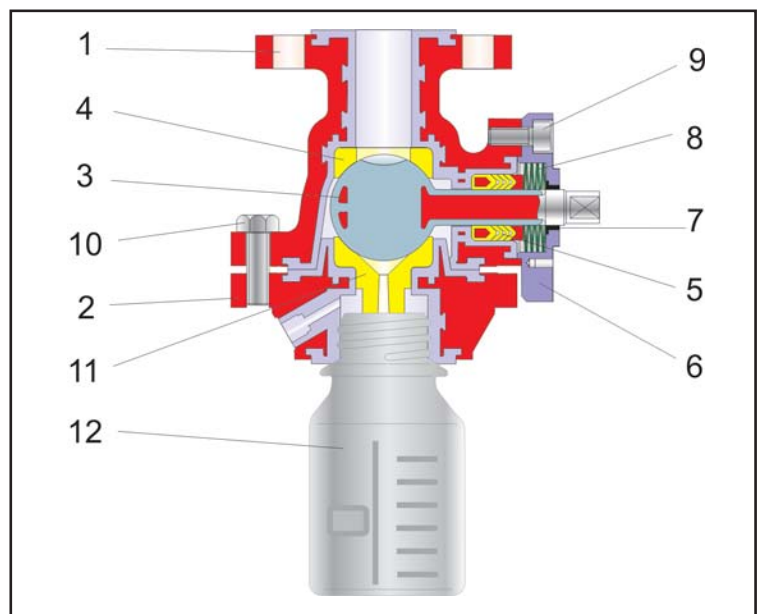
Sectional view of sampling valve series 271 => Parts list, see table 1 on page 2
